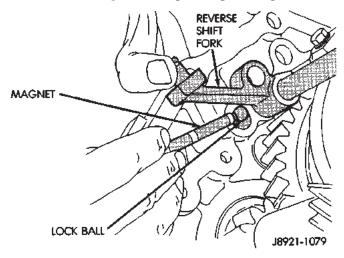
Remove Fifth Gear Shift Rail Lock Ball
